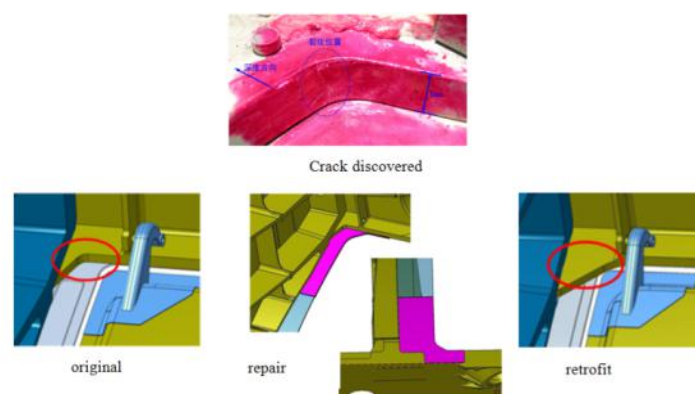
Crack of main landing gear side beam and repair/modification
